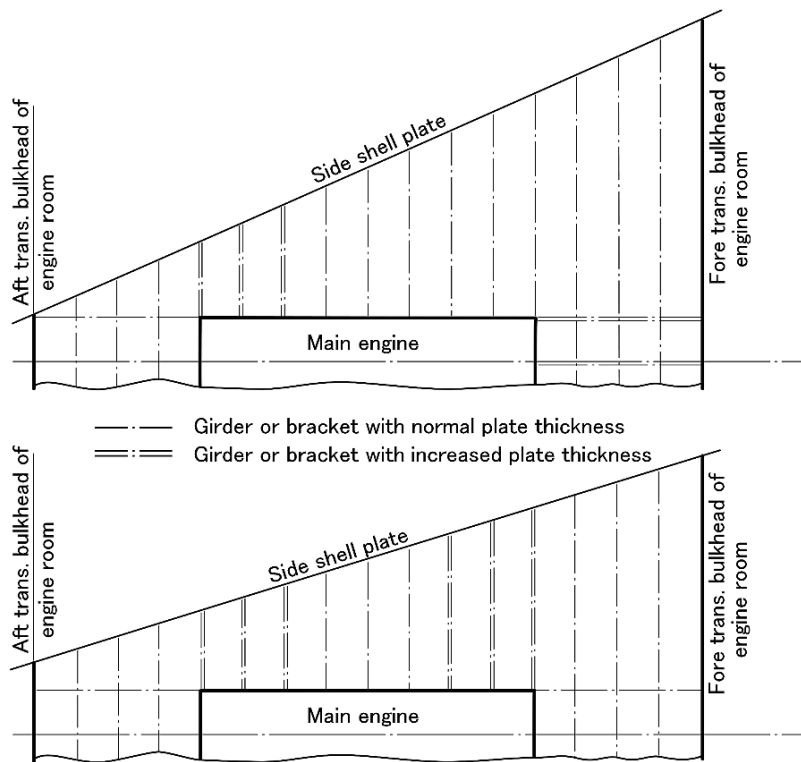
Floor and girder arrangement of engine room double bottom
